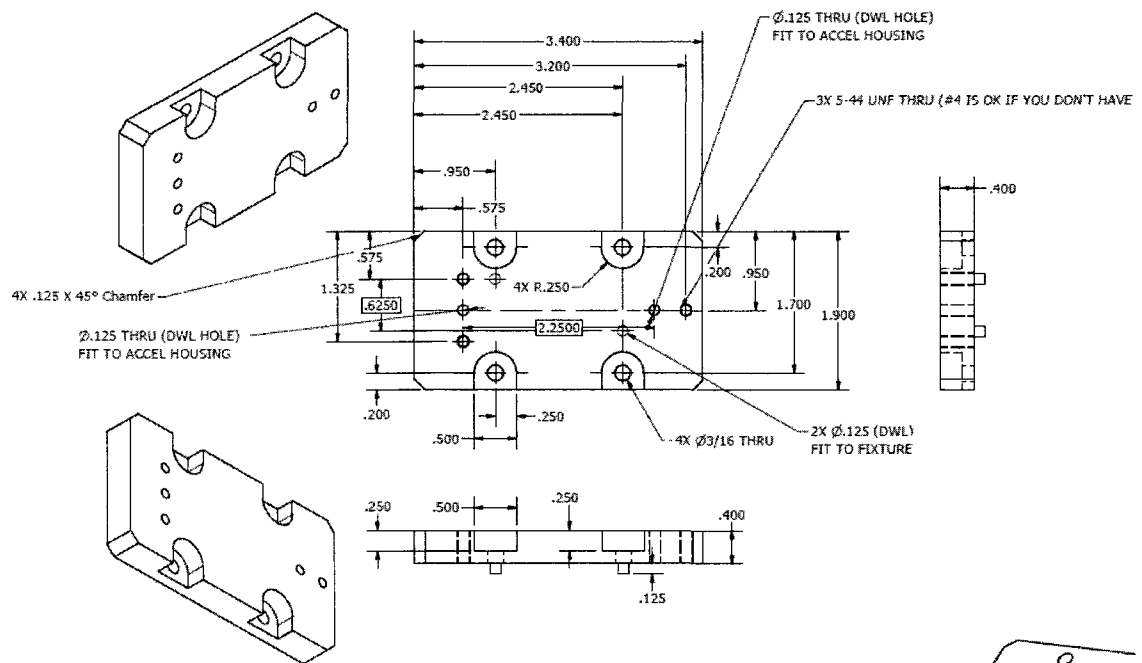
Centered System Arm Accelerometer Adapter CAD Drawing
